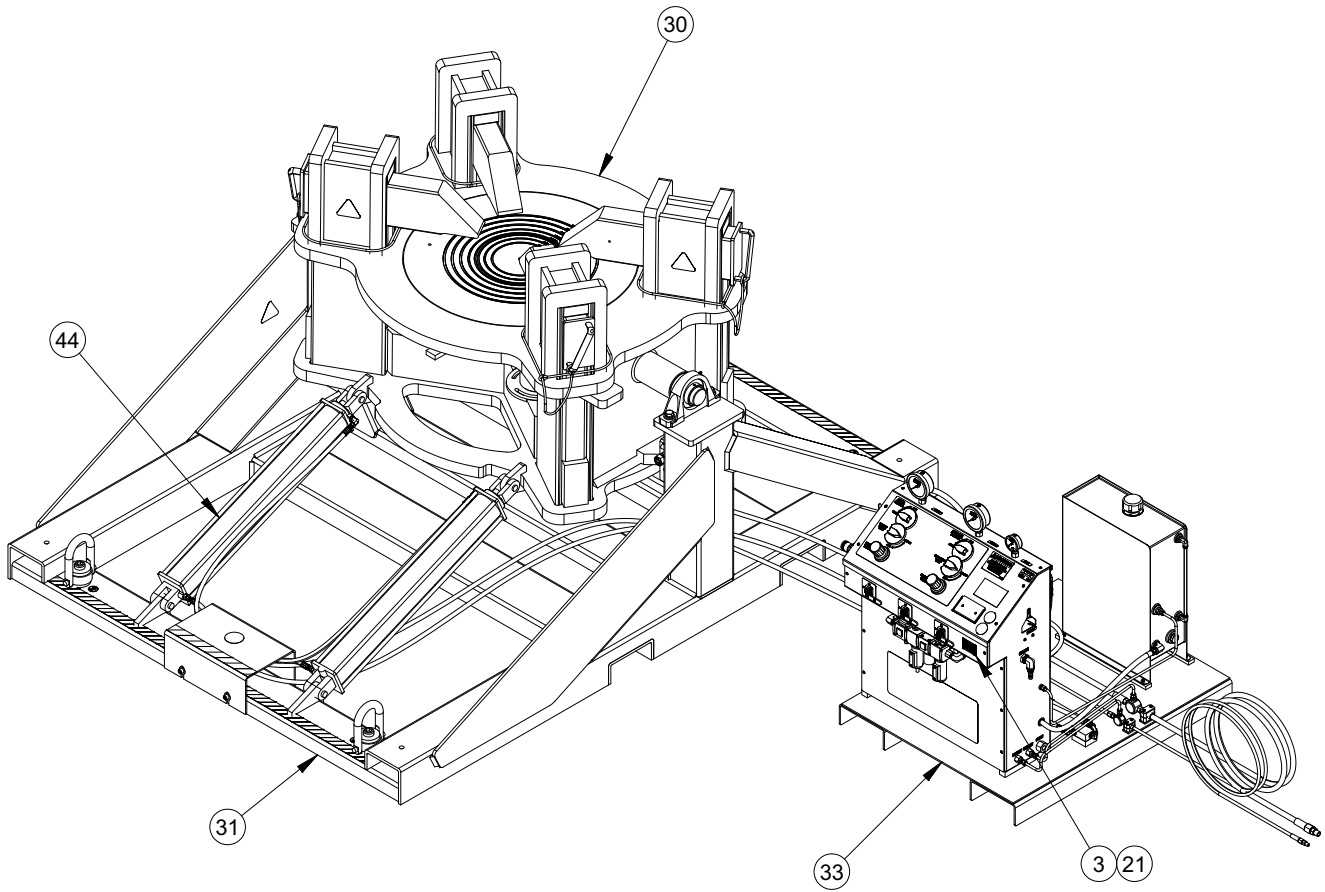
UFV-24-300T ASSEMBLY 1 (P/N 91681)
